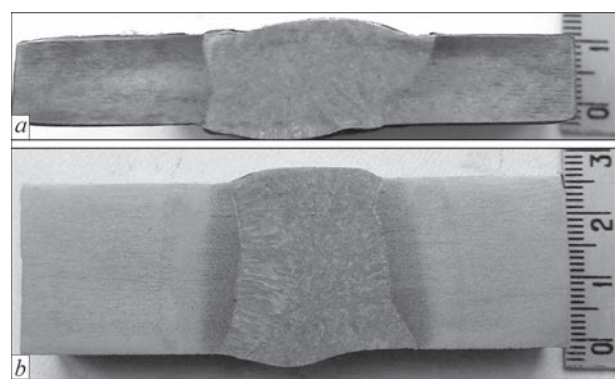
Transverse macrosections of welded joints of 12 (a) and 25 mm (b) thick
